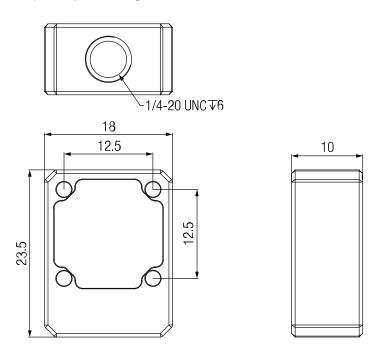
Dimensional drawing of ME-ADPT-MU-T-KIT
